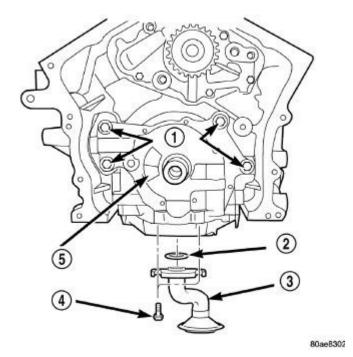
Oil Pump & Pick-up Tube Courtesy of CHRYSLER LLC
